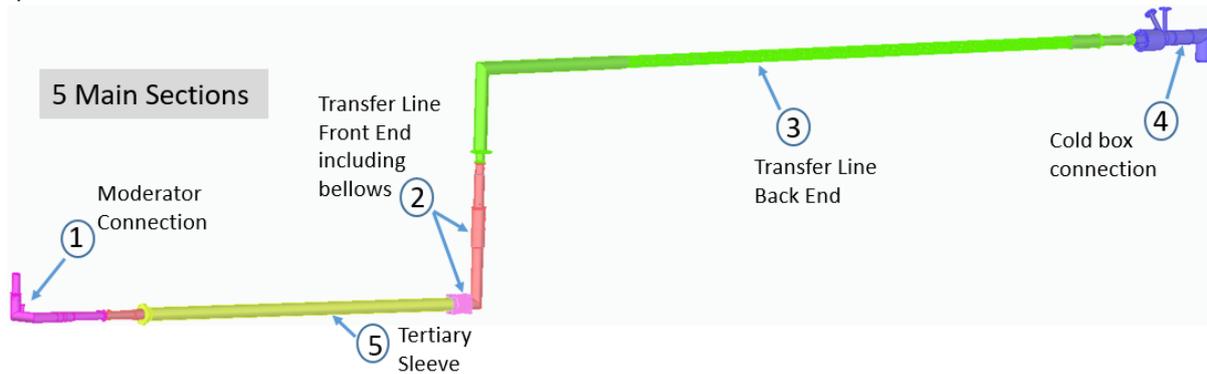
A view of the replacement methane transfer line assembly (concept) containing 5 main parts or sections.
